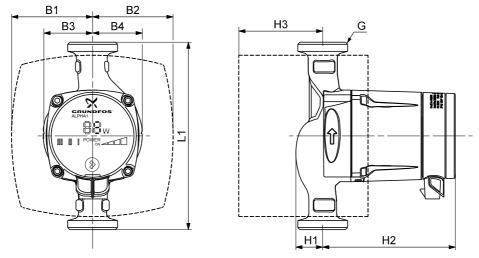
Dimensional sketches, ALPHA1 XX-40, XX-45, XX-60
